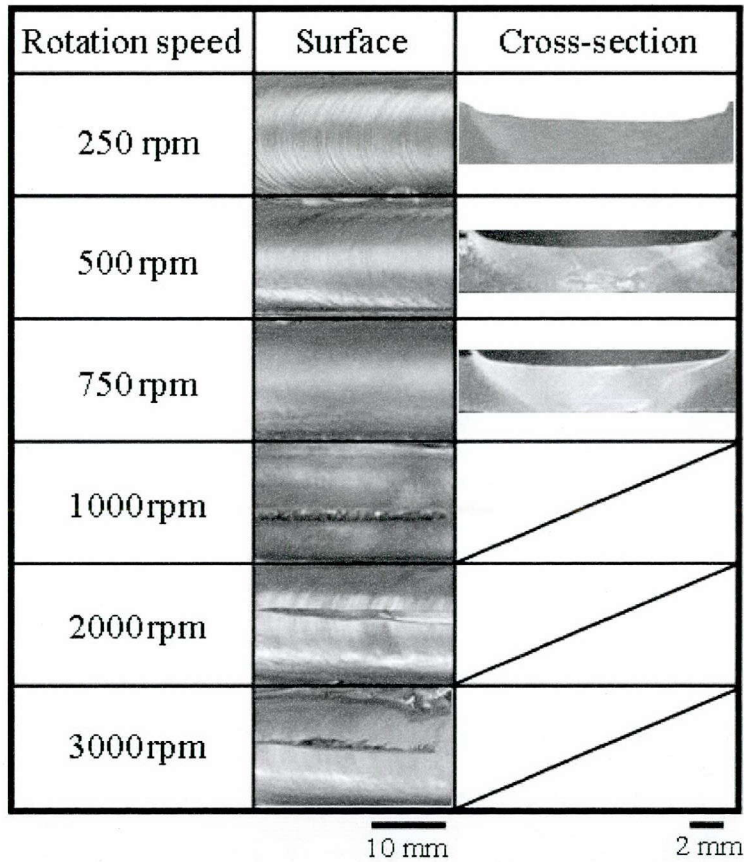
Surface and cross-sections of the FSPPed samples.
